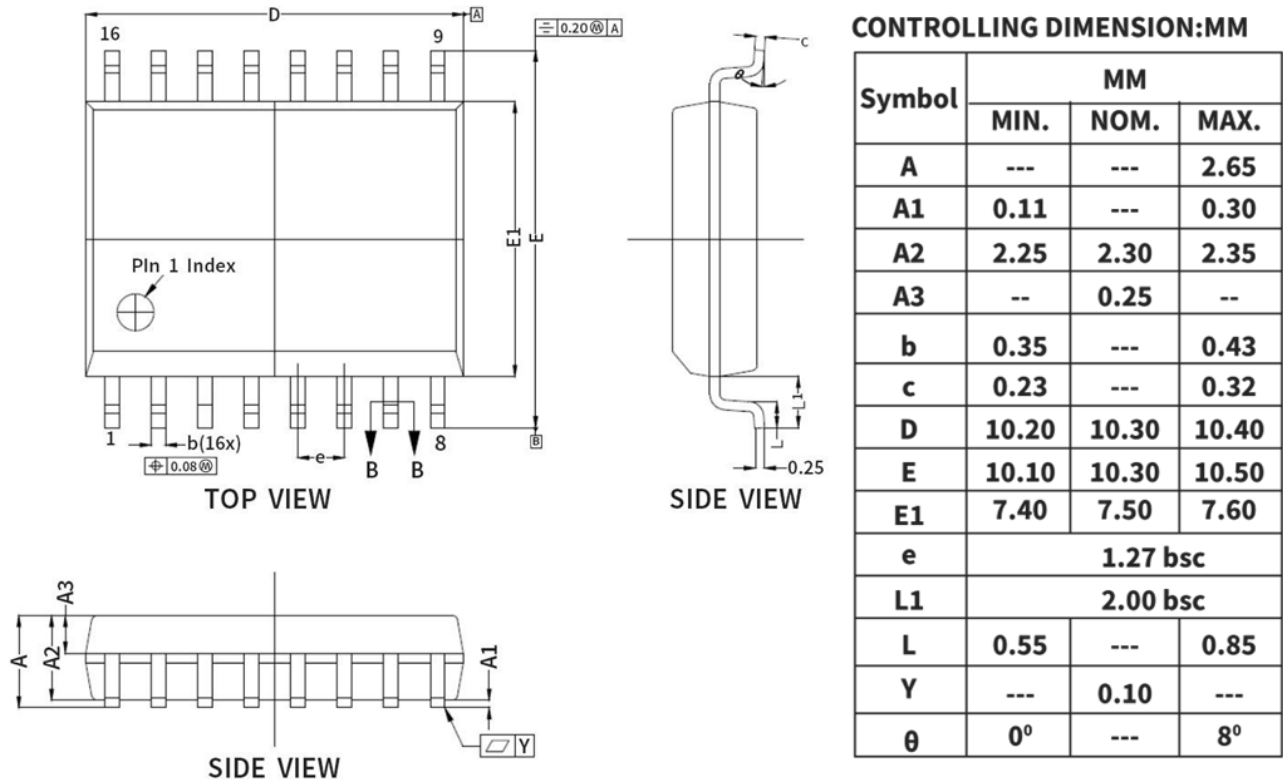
CMT10XXX SOIC 16 Package Shape and Dimension in Millimeter
